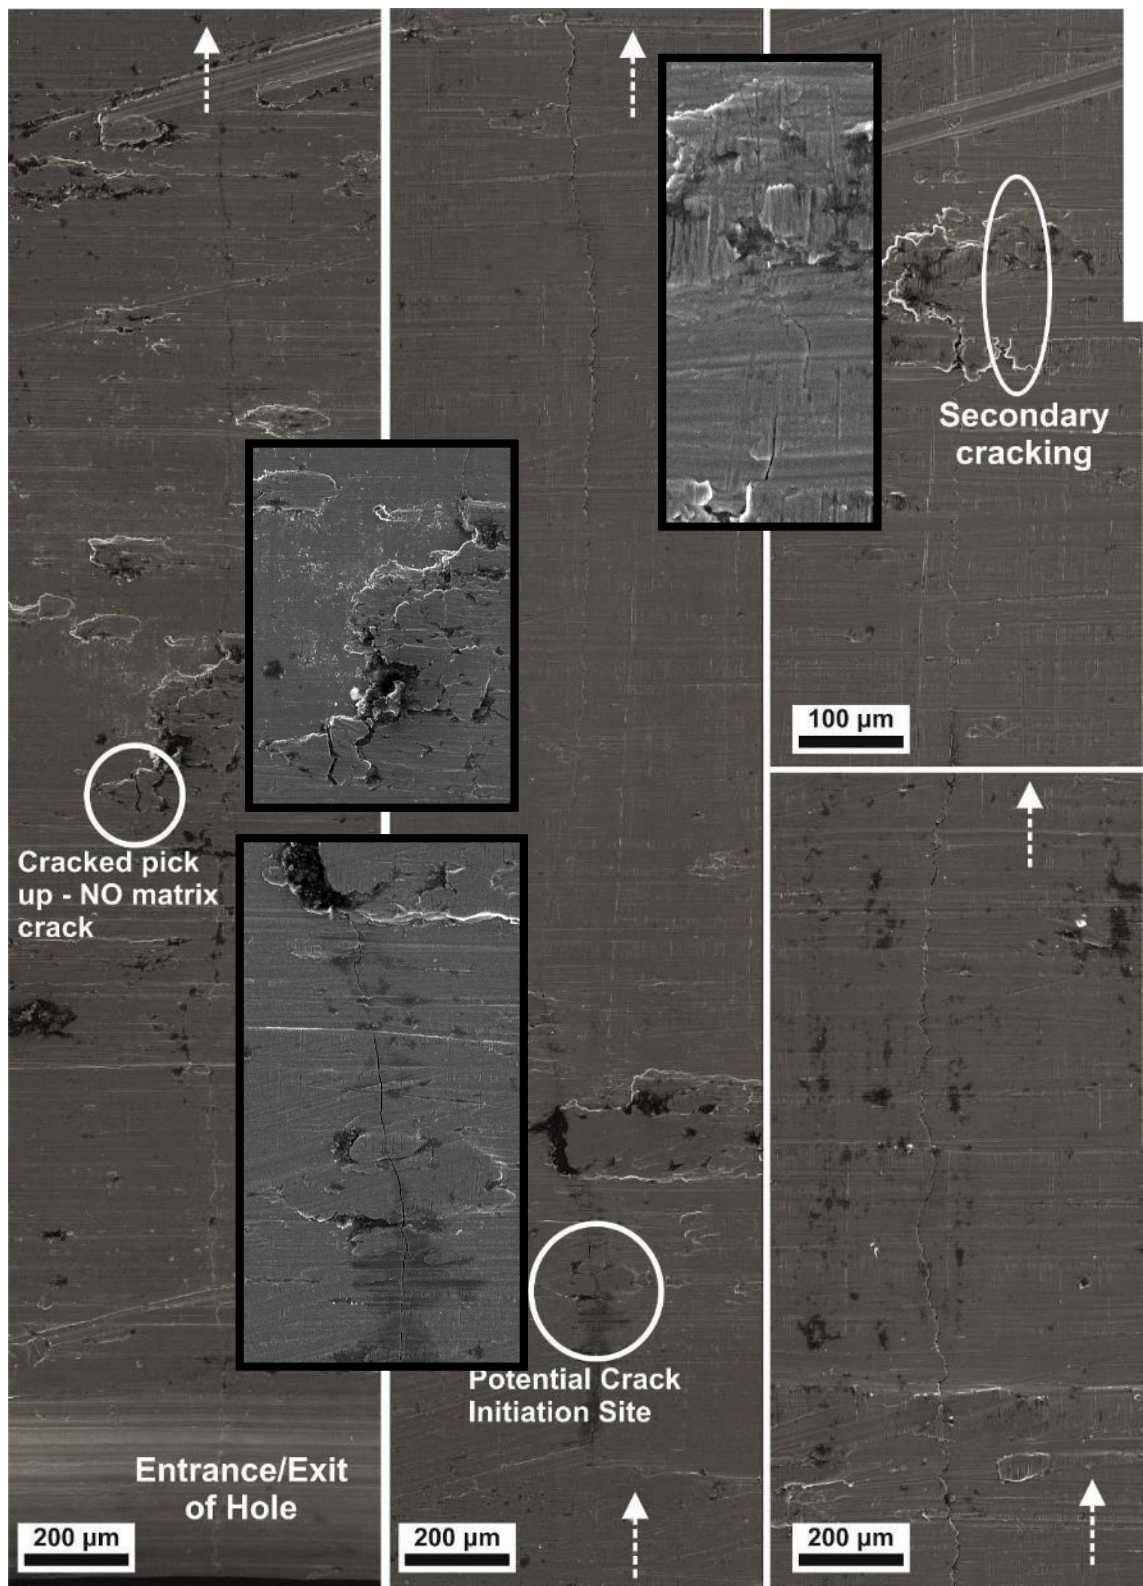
Specimen 2 @ 72559 cycles; Main crack, fully cracked side of the hole.
